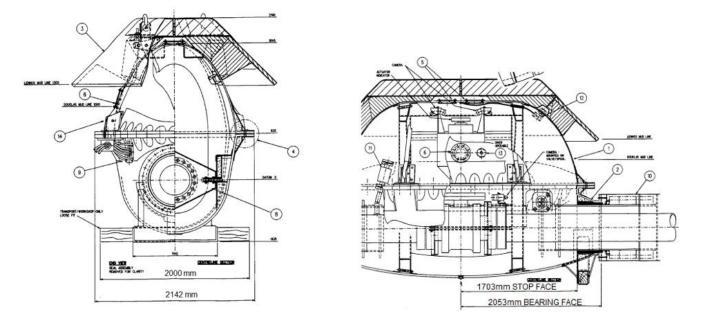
Subsea Barrier Valves - Dimensions and GAs
